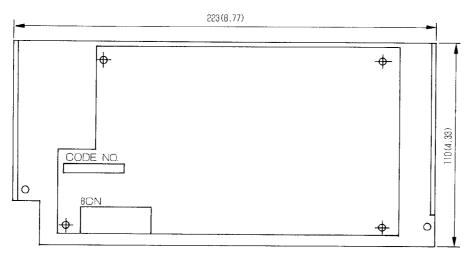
Dimensions of Orientation Card in mm (inches)
